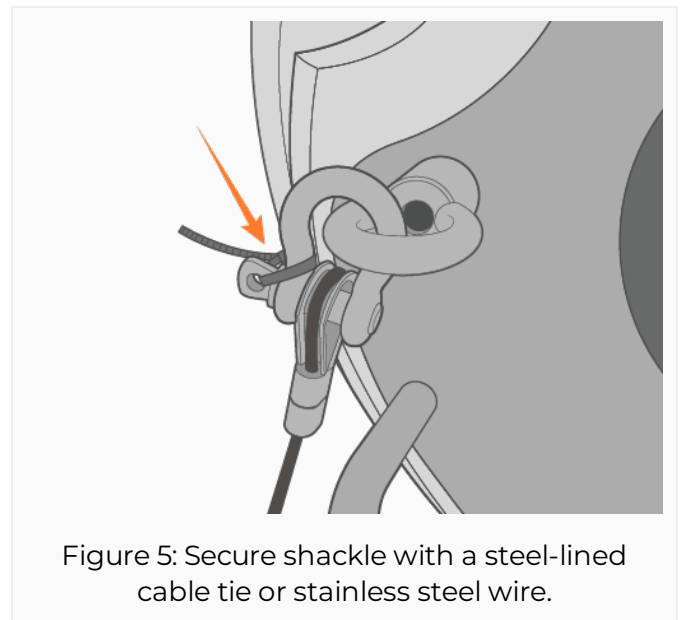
Secure shackle with a steel-lined cable tie or stainless steel wire.
